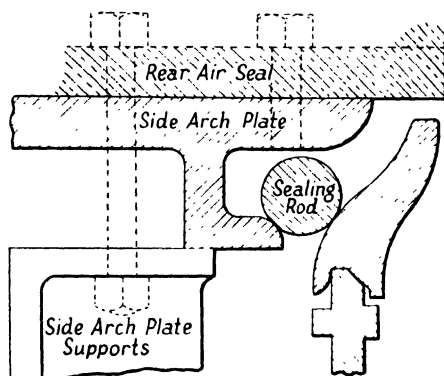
DETAIL OF SIDE SEALS FOR CHAIN-GRATE STOKER, STYLE 6
